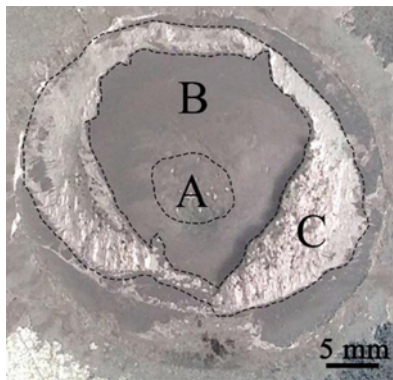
Fracture surface morphology of DP 600/A5052/DP 600 joint at DP 600 side after tensile-shear testing
